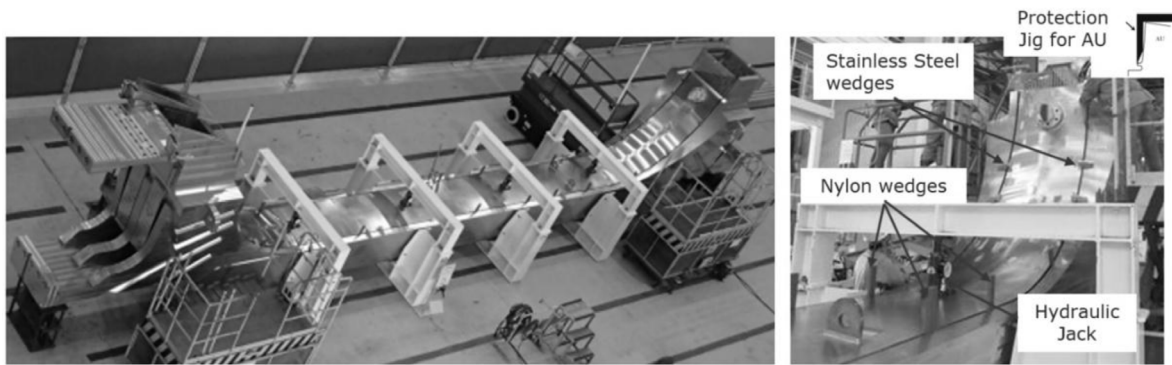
Weld root matching tolerances of the TFCS.
